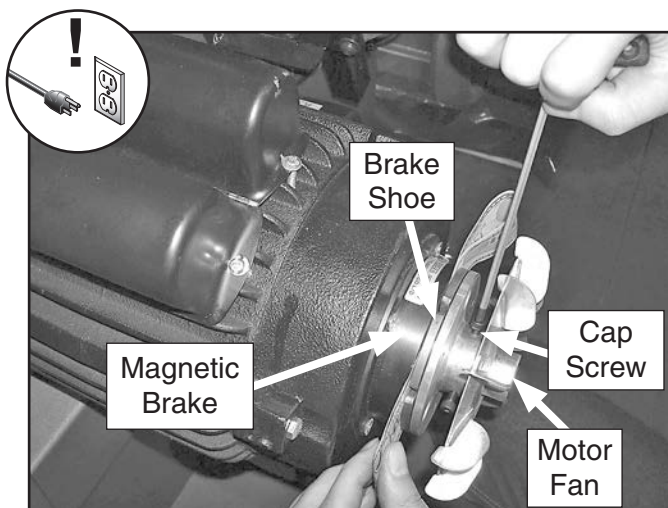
Adjusting distance between magnetic brake and brake shoe.
